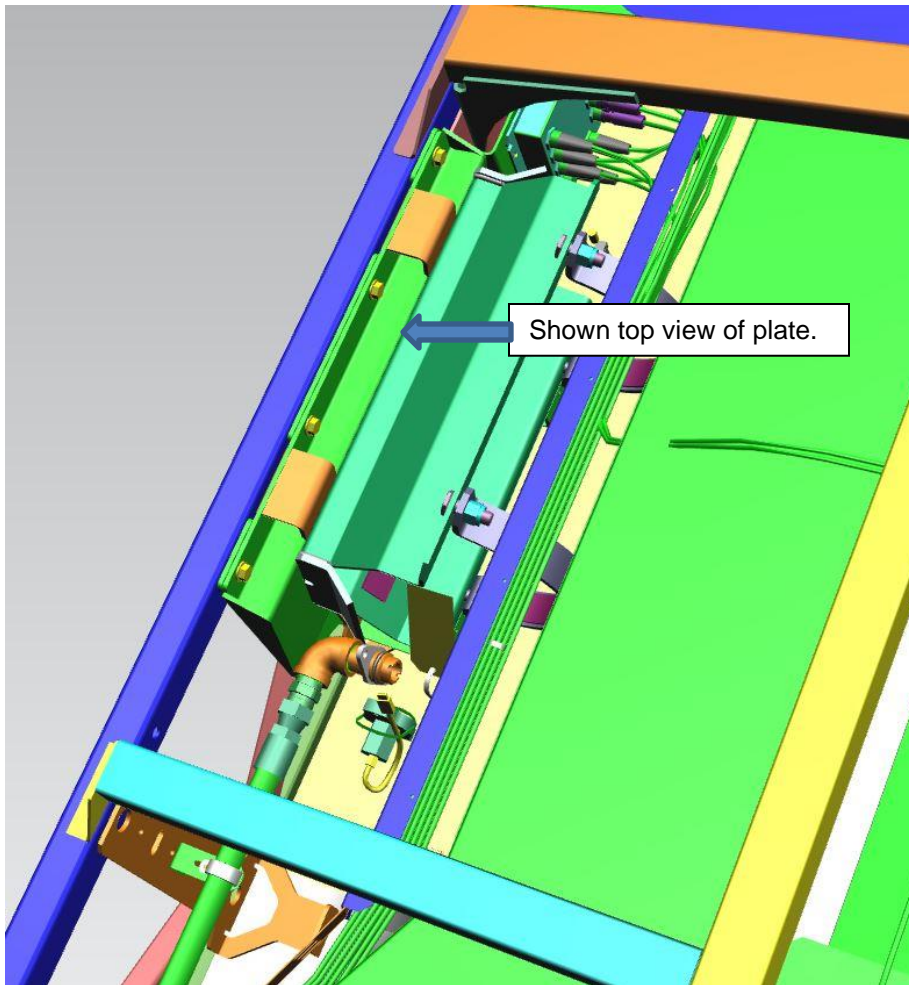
A: SHOWN MORE VIEWS OF THE NEW MOUNTING PLATE.
